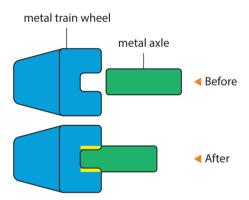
Shrink fitting two metal parts together using thermal expansion
